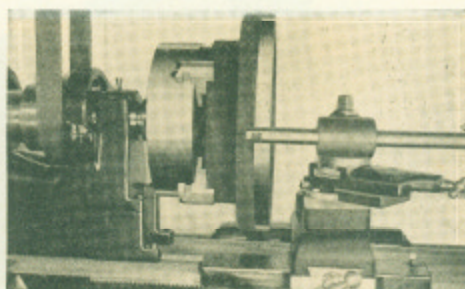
Turning a Balance Wheel 22" in diam. Using Heavy Duty Turning Tool
